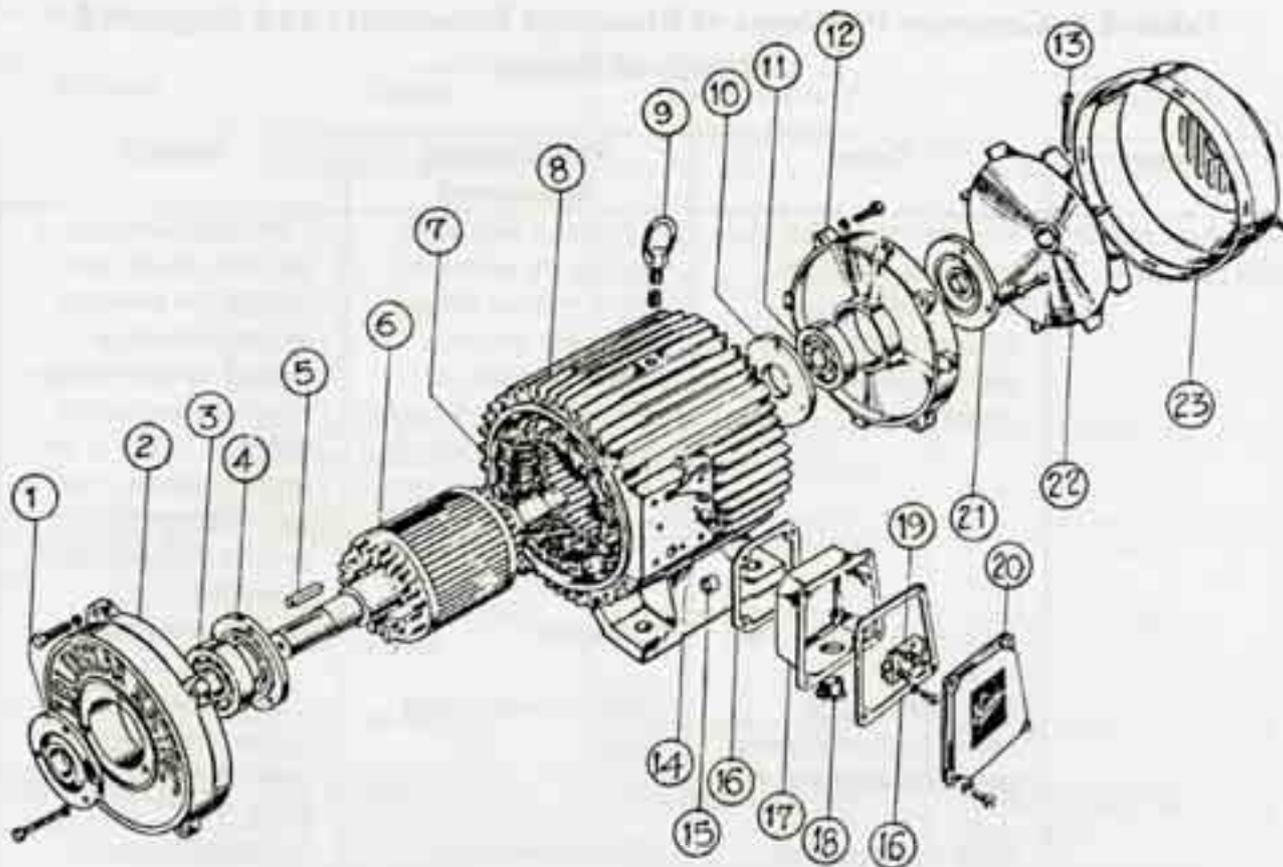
Exploded View of a Brushless Synchronous Generator
